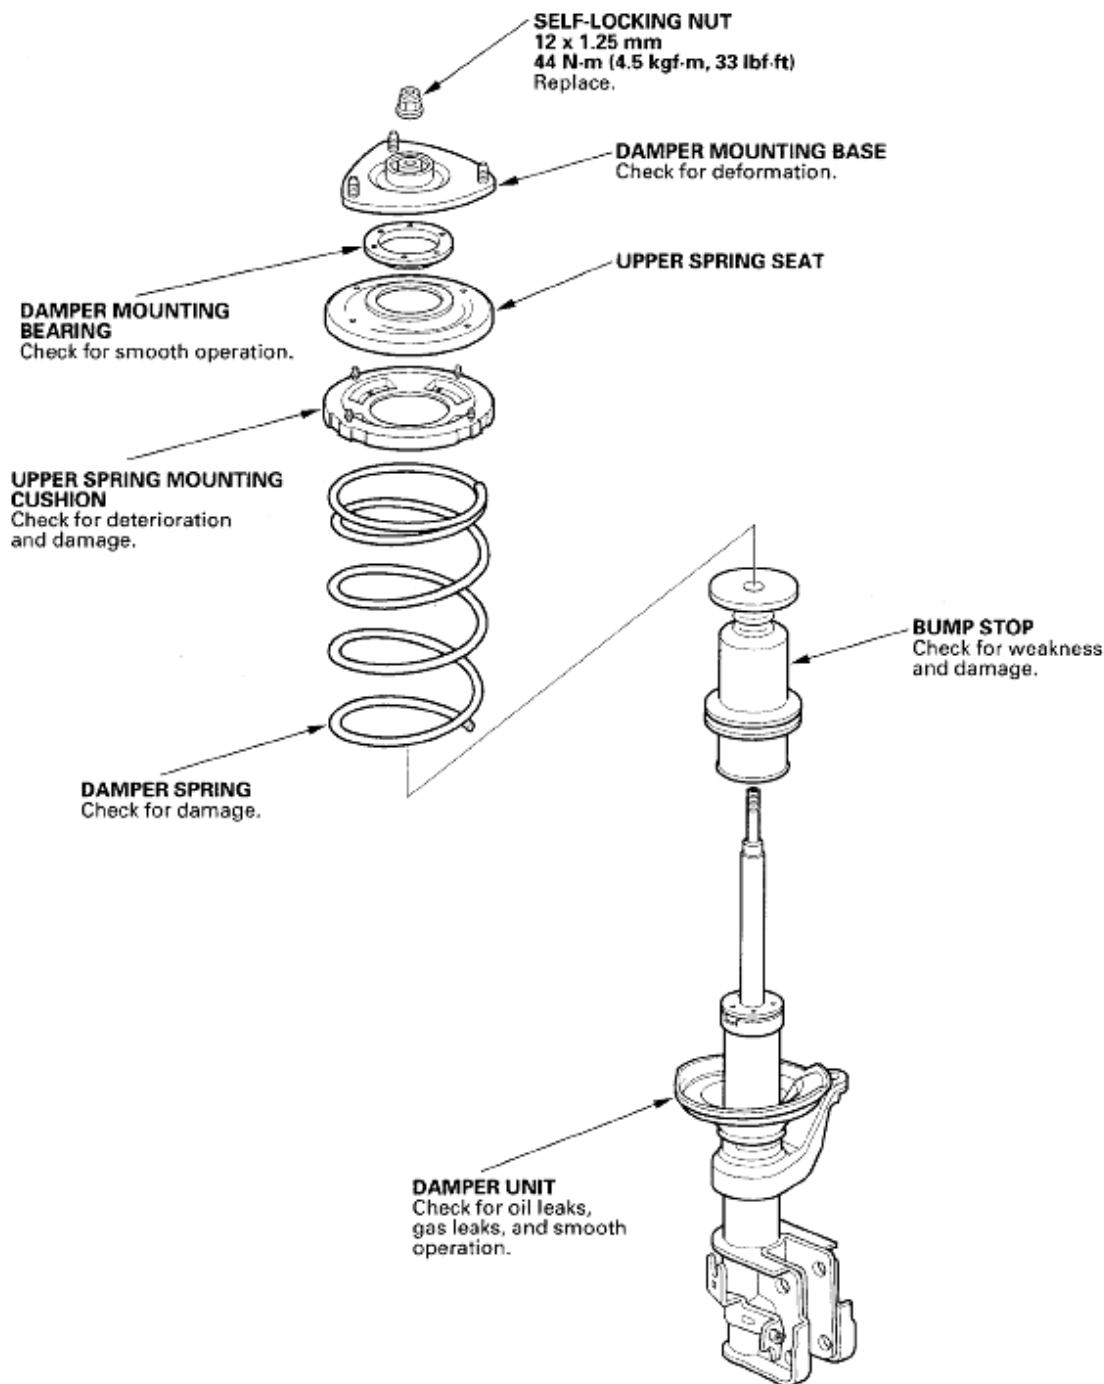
Exploded View Of Damper/Spring With Torque Specification
